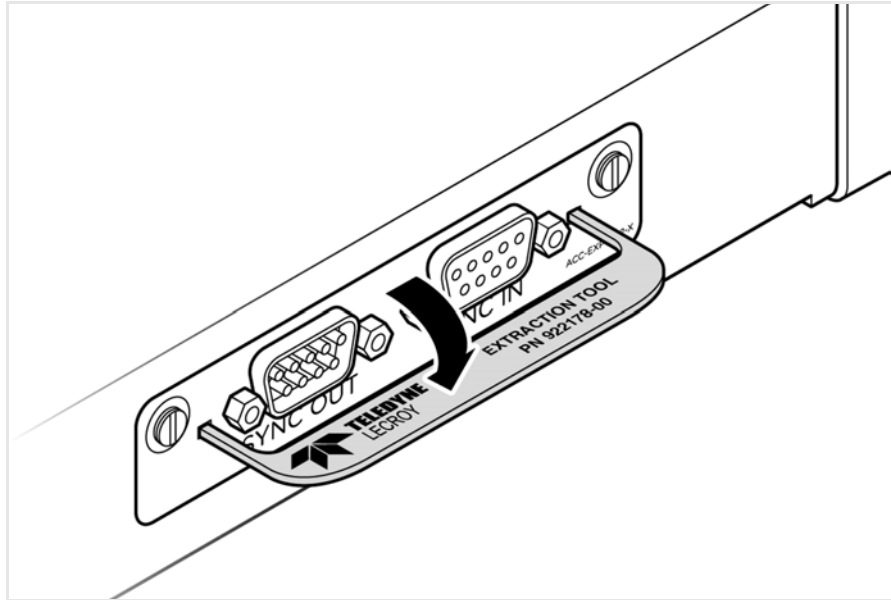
Insertion of Handle/Tool into Expansion Card Panel
